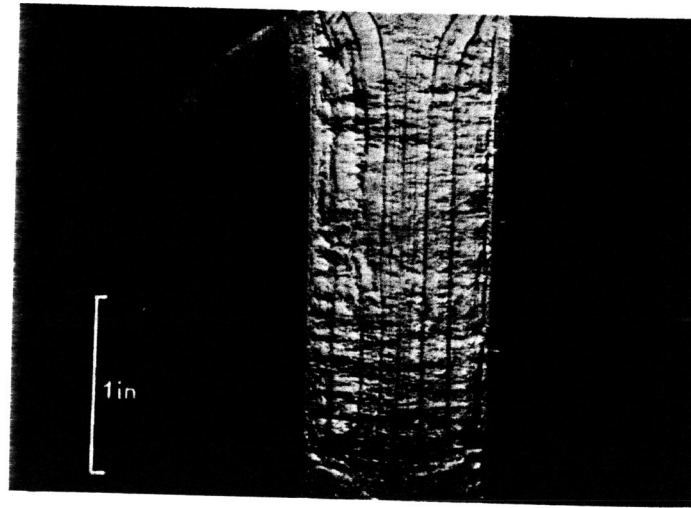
Fracture surface in 1100°F aluminum. $\phi = -5^\circ$ to 5° .
